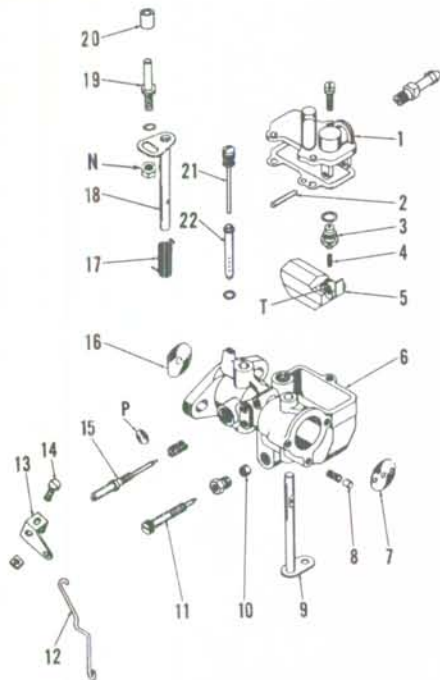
Exploded view of Tillotson MT carburetor used on 6 and 9.2 hp motors. Knob on instrument panel moves idle mixture needle (15) via link (12) and arm (13).
